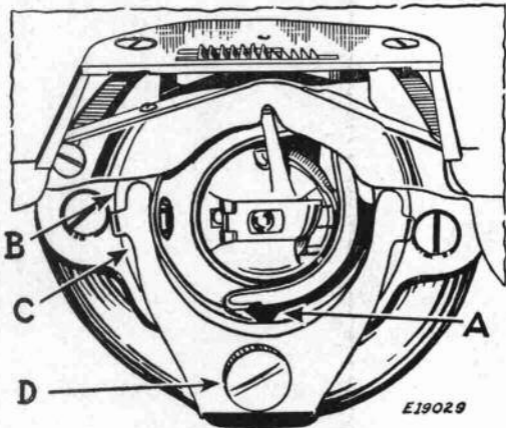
SHOWING POSITION OF SHUTTLE FOR REMOVAL FROM MACHINE
